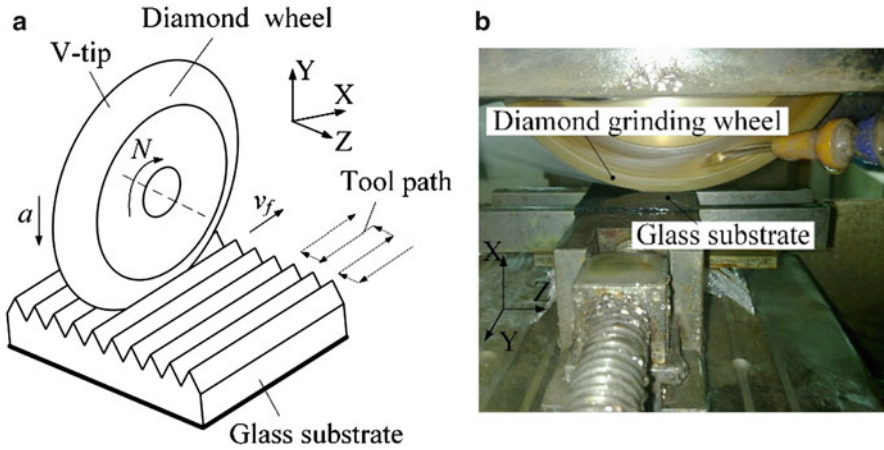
Micro-grinding of microlens array on glass substrate: (a) machining scheme and (b) machining scene
